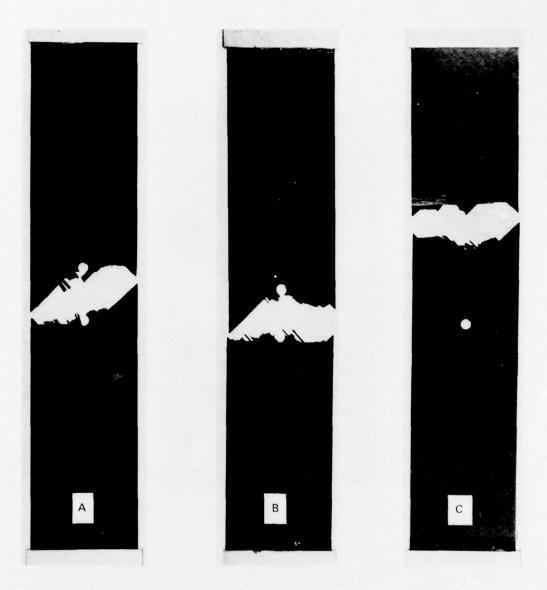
Fatigue failures of multi-plied $90\pm45^\circ$ CFC containing a 4mm diameter hole. Specimens were preconditioned for 3000 hours at 40°C and 95% RH and their endurances to failure were; specimen (A) 2449700, (B) 20600, (C) 4890 cycles
